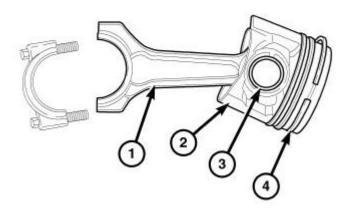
PISTON AND CONNECTING ROD Courtesy of CHRYSLER LLC
